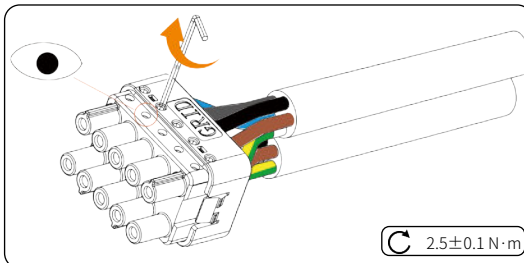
Inserting the Grid cable into the rubber core and tightening
